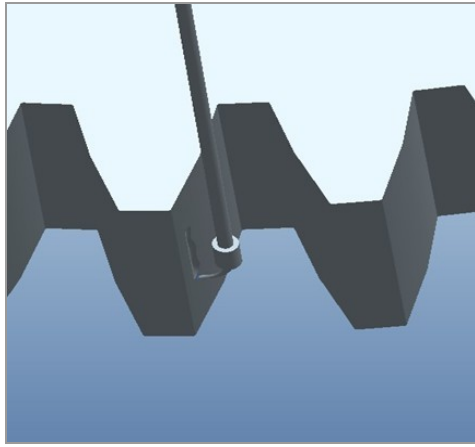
Welding gun moves along Z axis lead rail straightly that is positive gear width direction.
